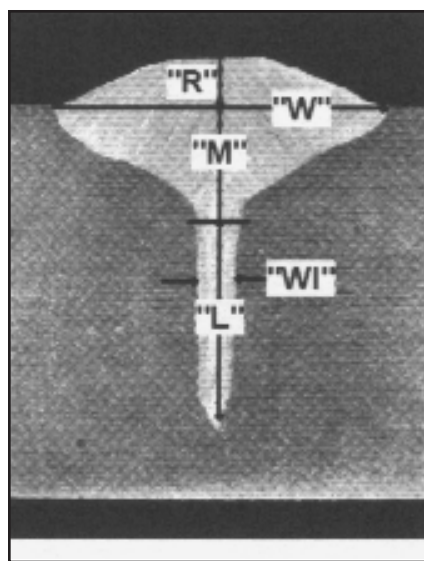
Nomenclature of weld bead dimensions (5 $\times$ ).
